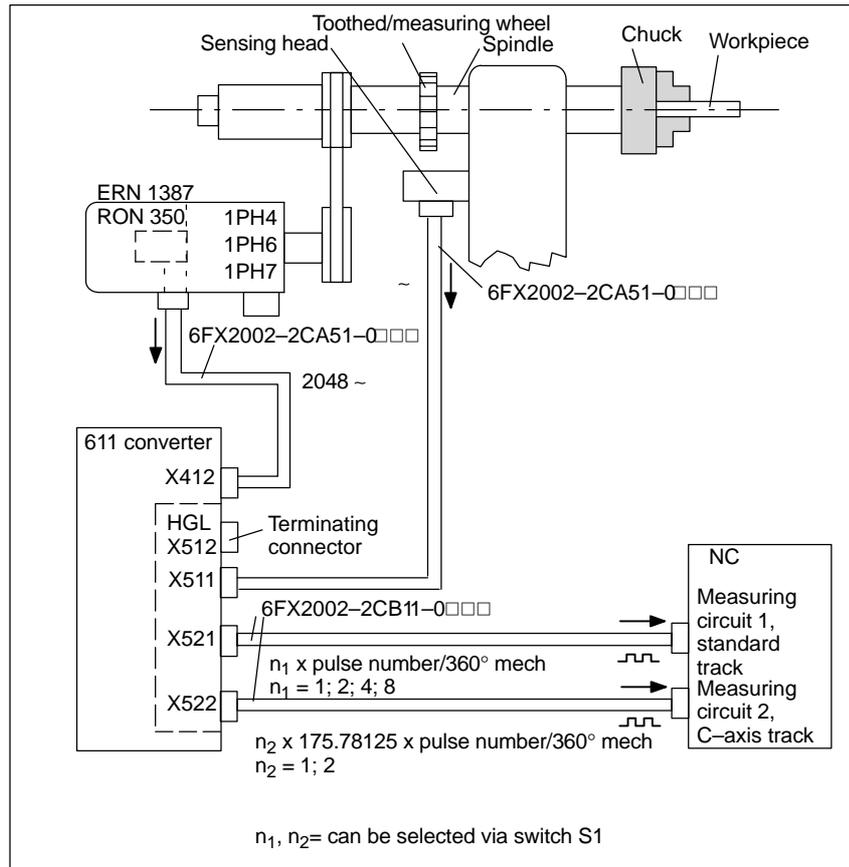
System configuration 1PH4/6/7 motor with C toothed-wheel encoder as spindle encoder
